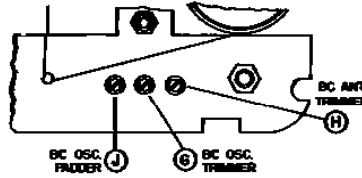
Front View of Chassis Showing Location of Alignment Adjustments
